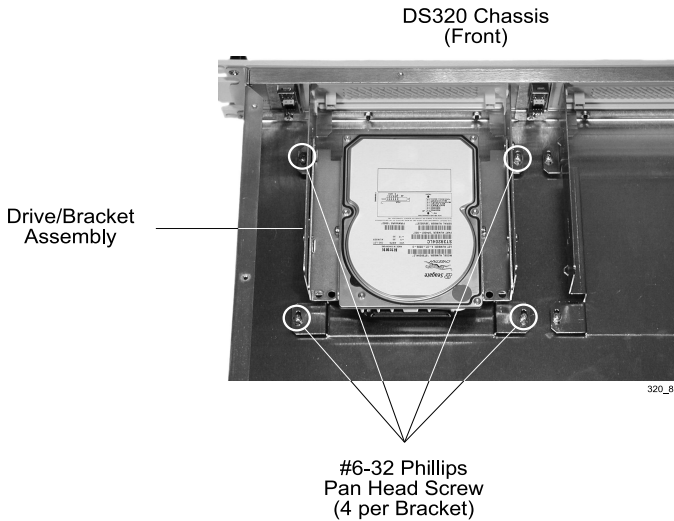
Installing the Drive/Bracket Assembly into the Chassis
